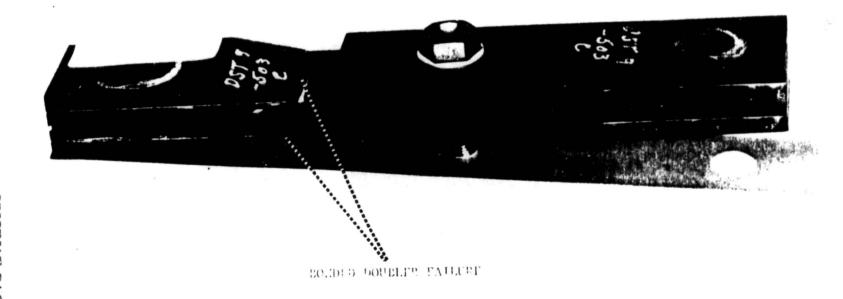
DOUBLE SHEAR TENSION TESTS - BONDED DOUBLER FAILURE
